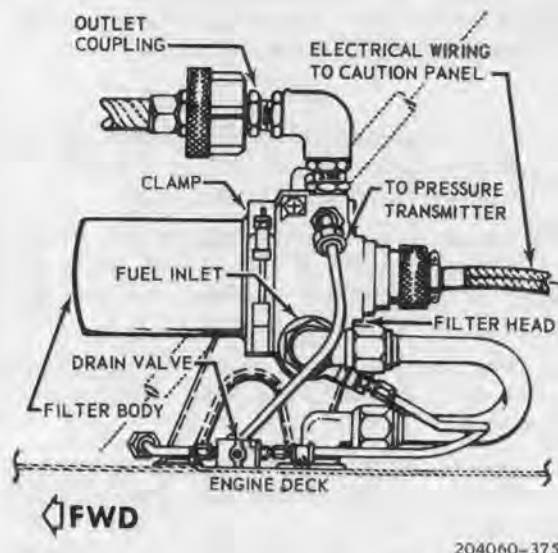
Fuel filter — electrical bypass indicator type — UH-1B
